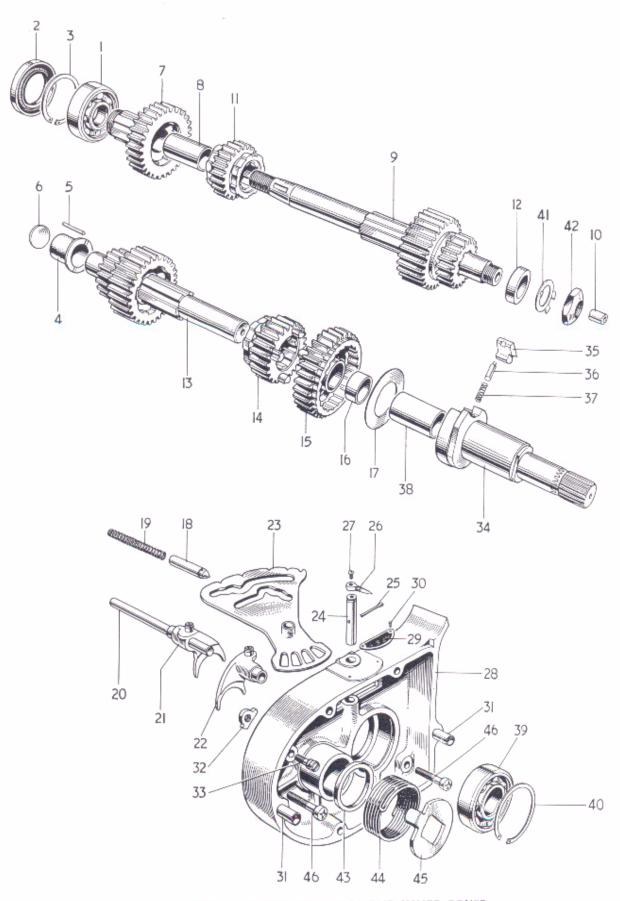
GEARBOX SHAFTS, BEARINGS AND INNER COVER.
